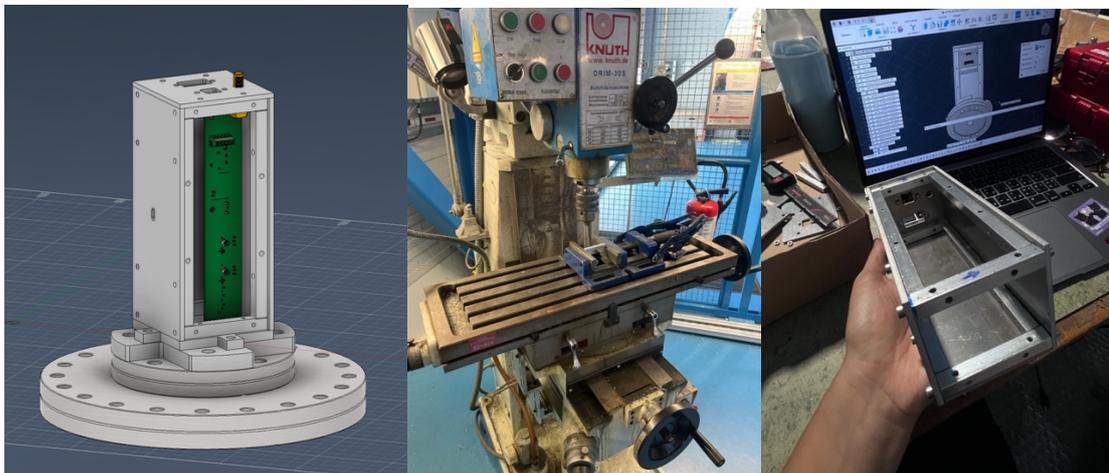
(a) 3D CAD design of amplifier box. (b) 3-axis milling machine. (c) Completed box assembly.
